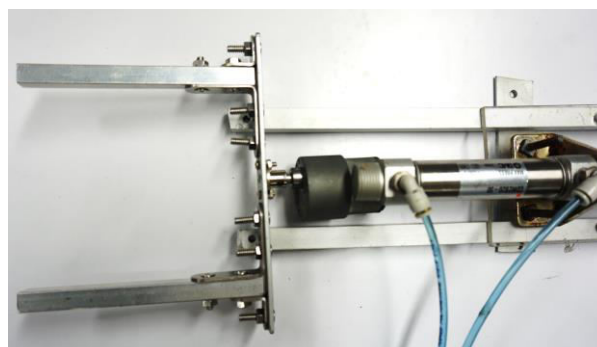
Camera Position of rotational arm located at the rear part of the pay load
